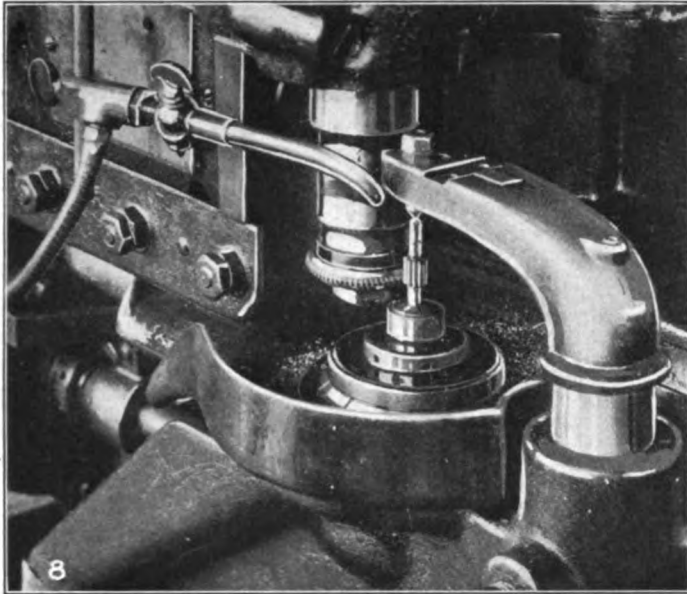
CUTTING PINIONS. FIG. 9—HOBBIING GEARS
